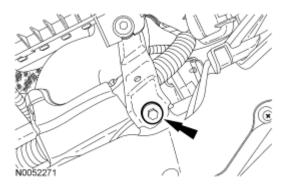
Locating Air Cleaner Assembly Bracket Bolt Courtesy of FORD MOTOR CO.
